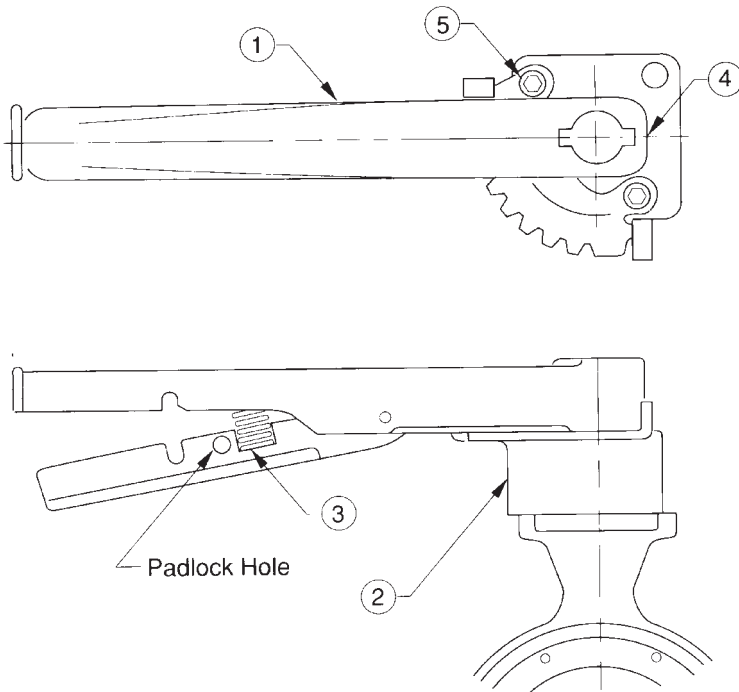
Quarter-turn wrench mounted on plug valve. (Courtesy of The Duriron Company, Valve Division)
